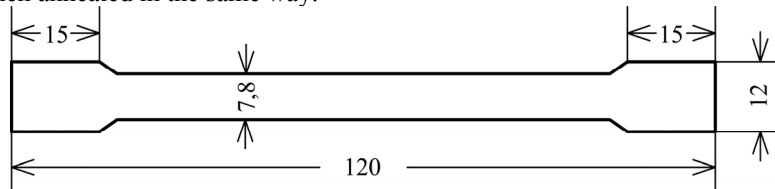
Form of the specimens made for tensile tests. Dimensions are in millimetres.
